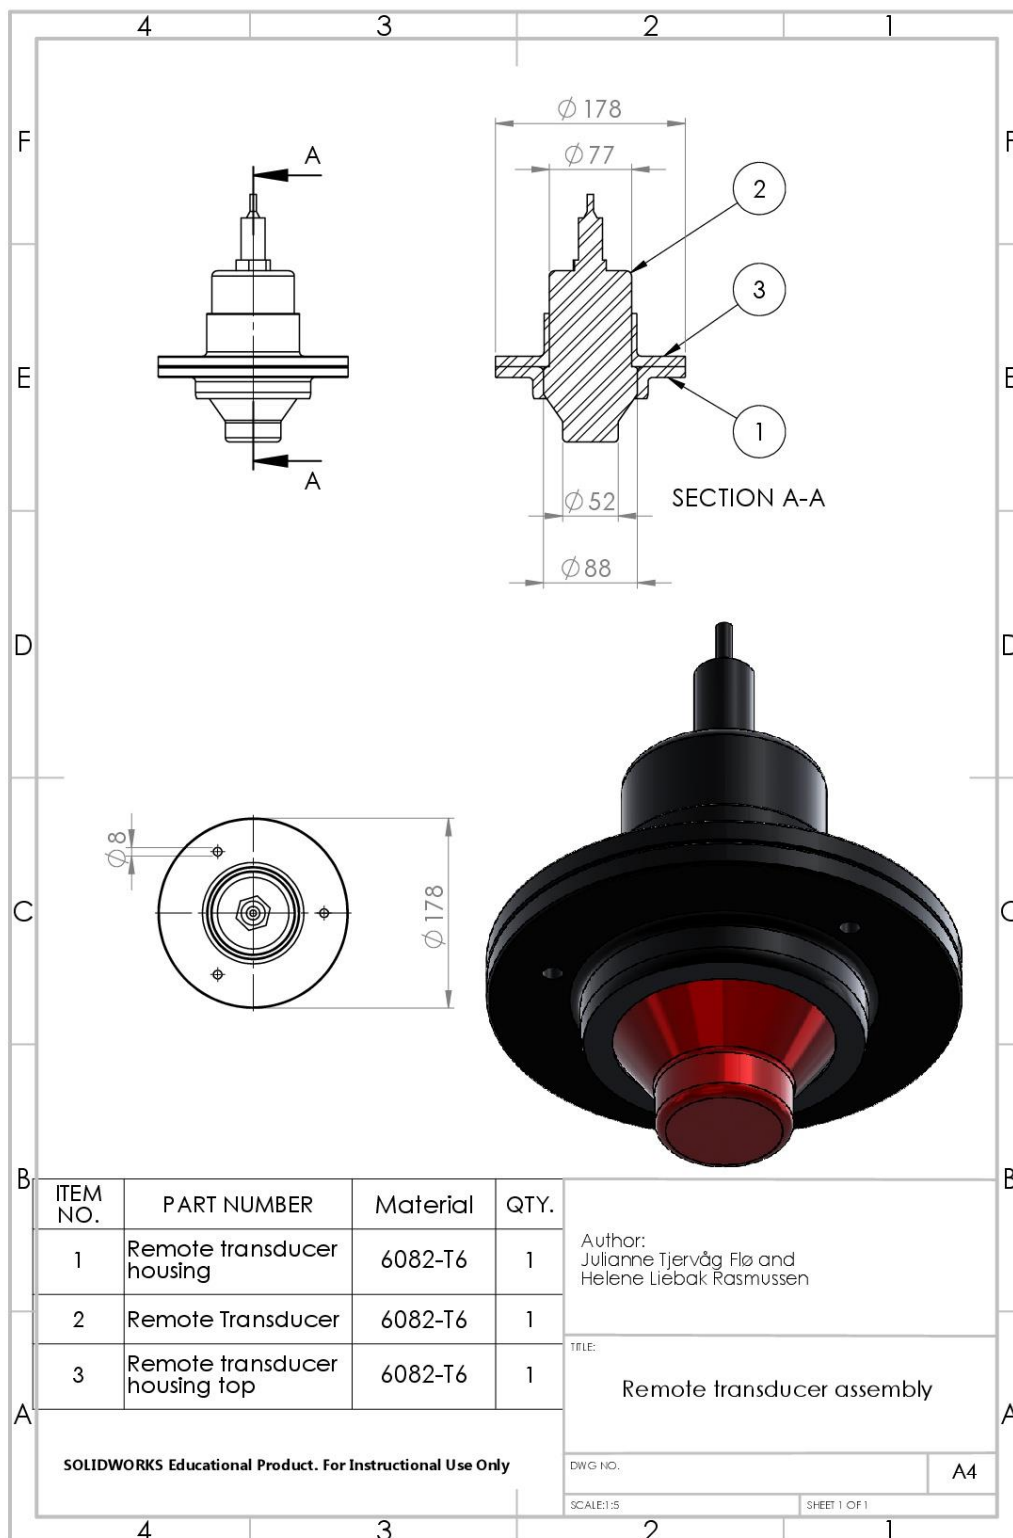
Technical drawing of the remote transducer assembly. Created in SolidWorks.
